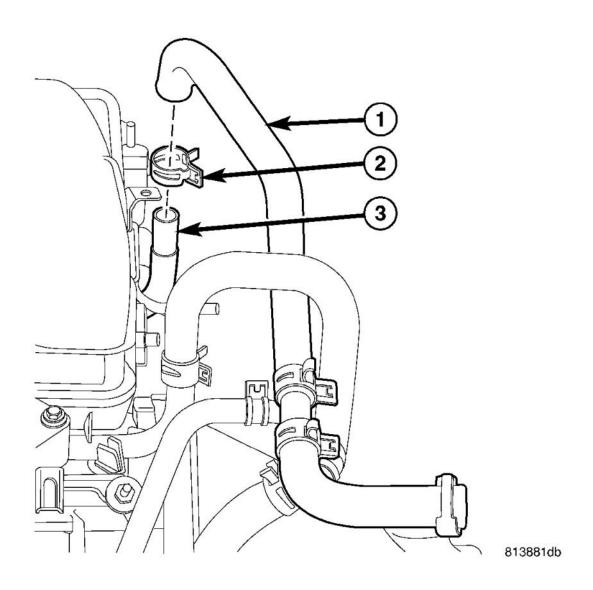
Heater Supply Hose Courtesy of CHRYSLER LLC
